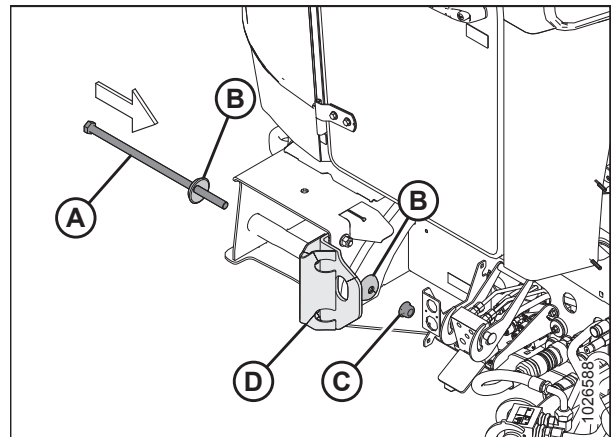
Reinstalling Leg Pin Bolt – Crane Lift Only
